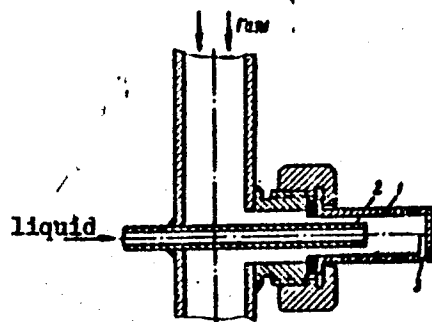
1- nozzle casing with a flat bottom; 2- feeder tube;
